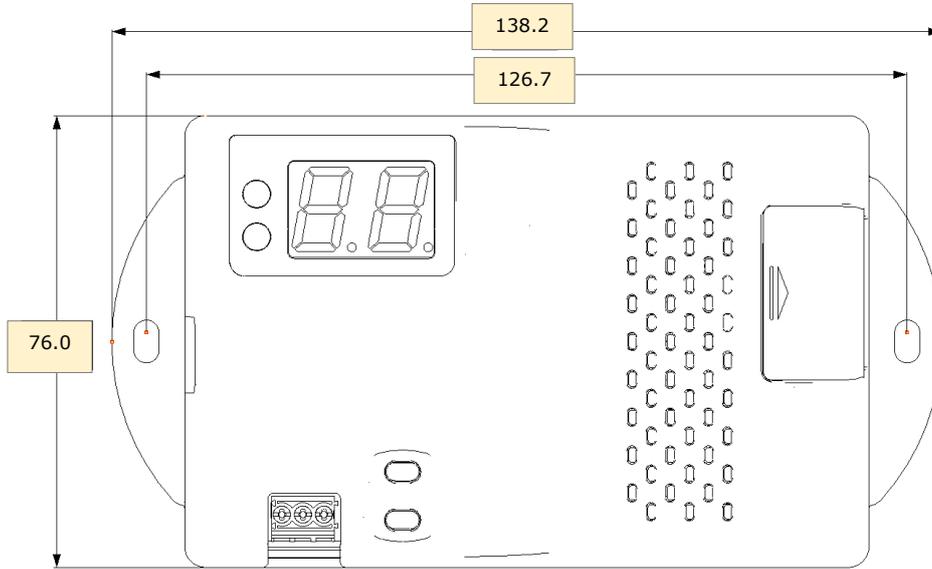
LDSBus Trailing Edge Light Dimmer Dimension – Top View
